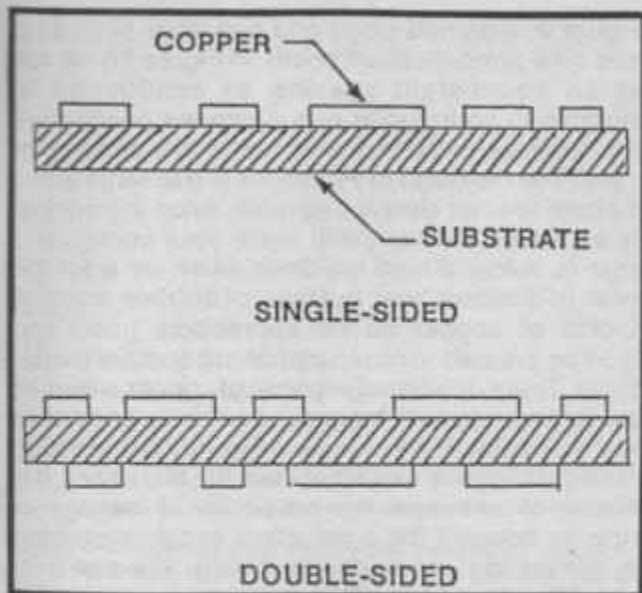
Cross-sectional views of single-sided and double-sided printed-circuit boards.
